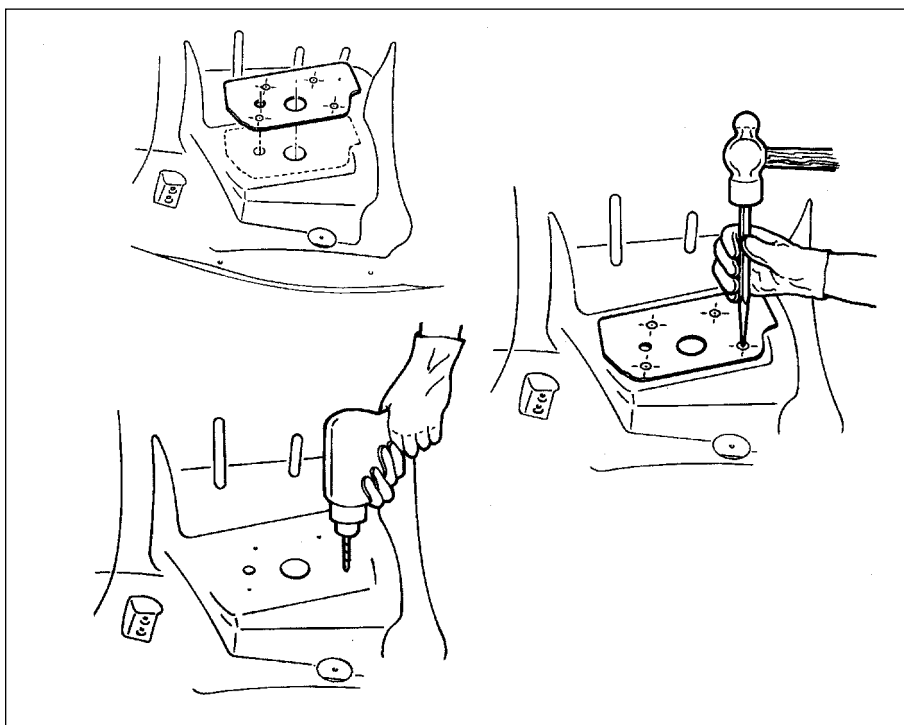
The technician needs to drill the attaching holes to mount a replacement upper control arm. A template is provided to locate and drill the holes.
